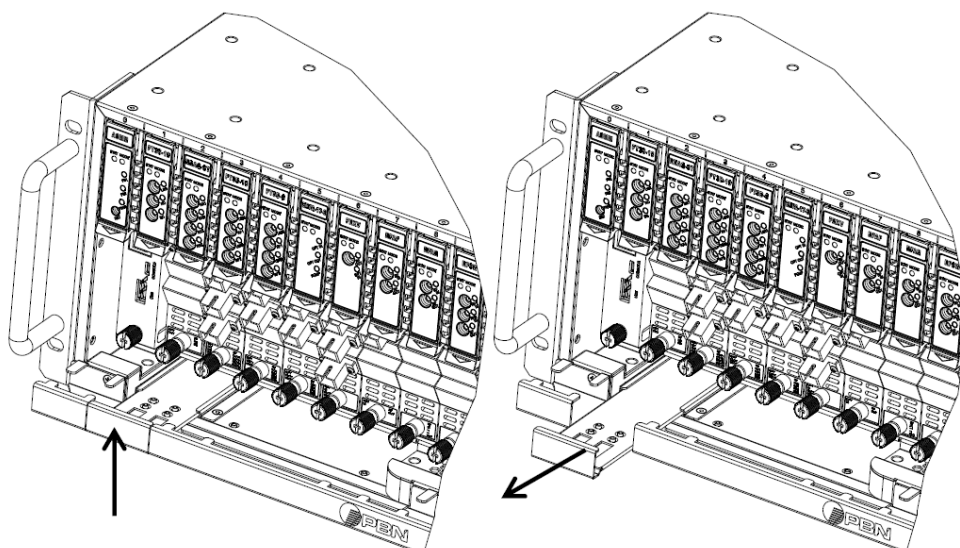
lift up the handle and slide the fibre guide out of the front of the chassis
